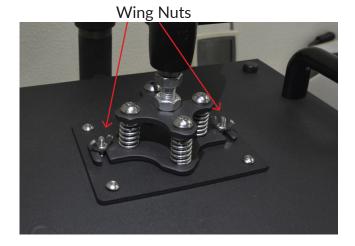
Remove the shirt attachment's heat platen by loosing the wing nuts.
